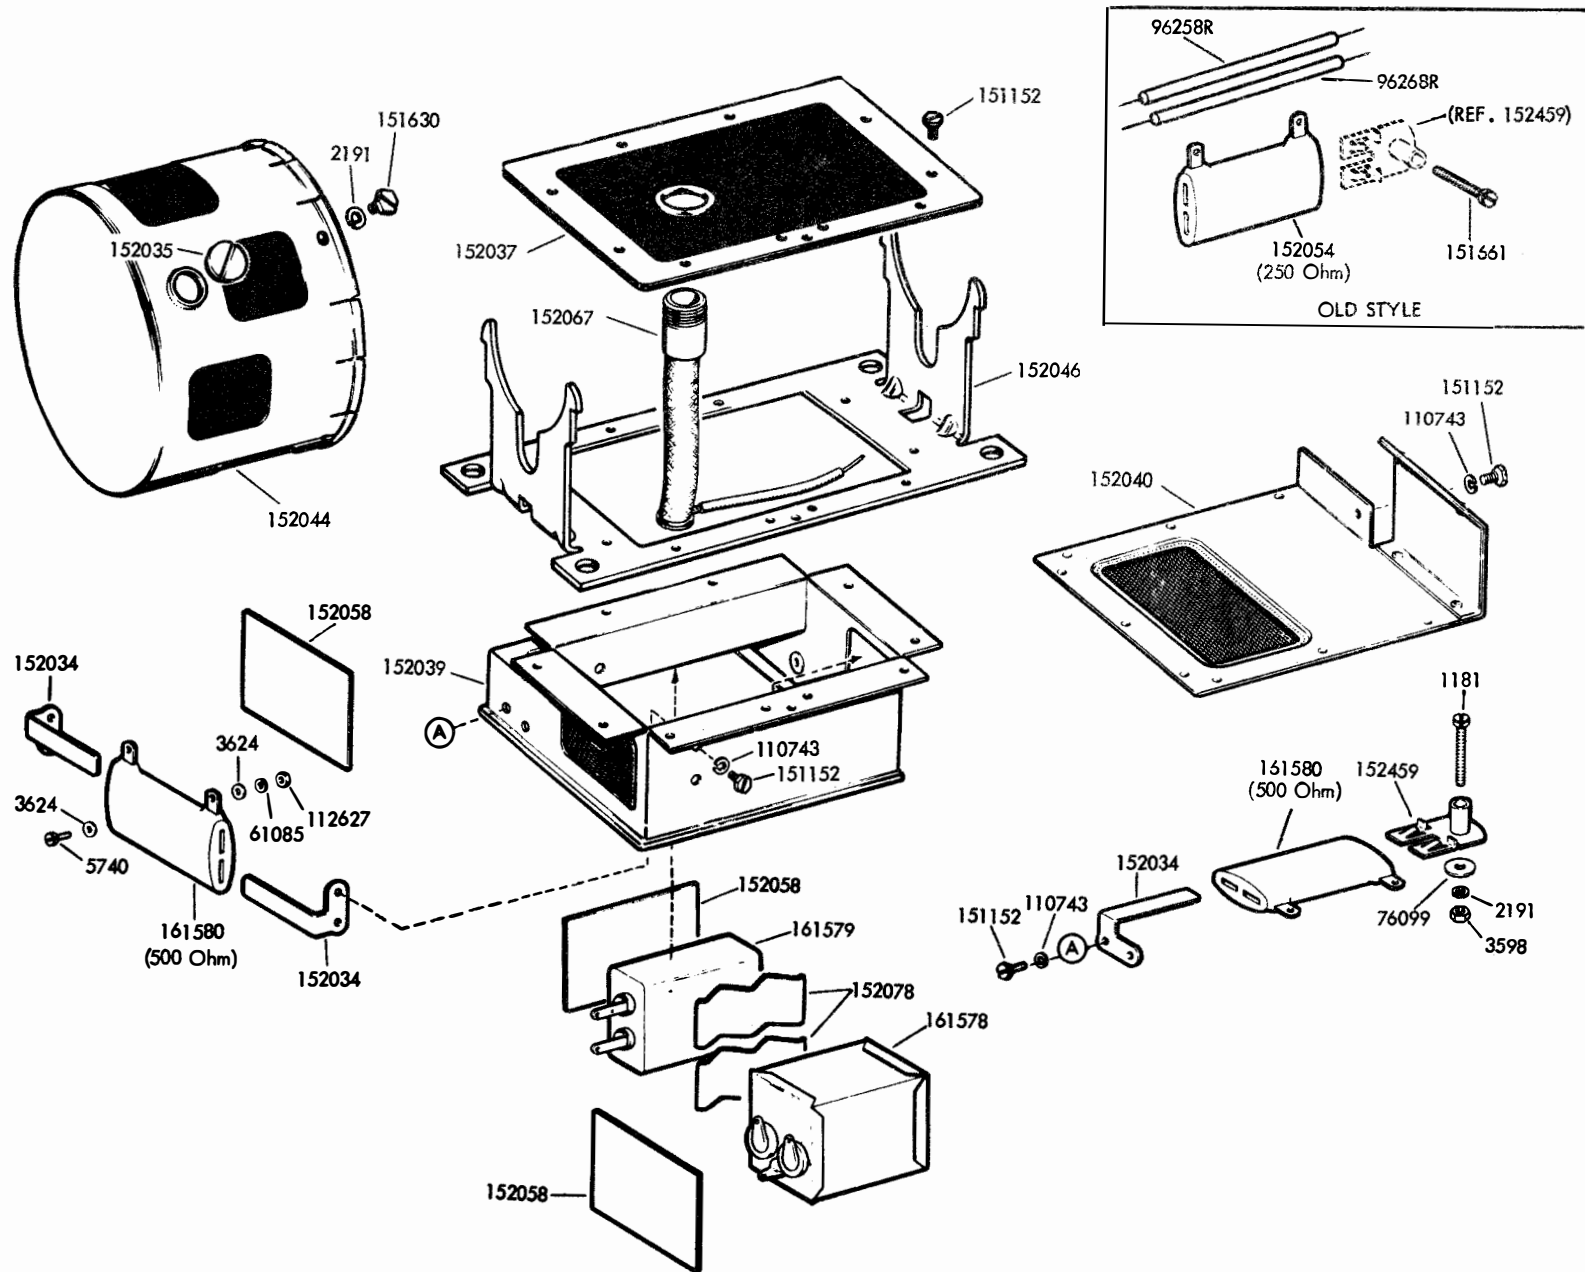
SERIES MOTOR MOUNTING PARTS
